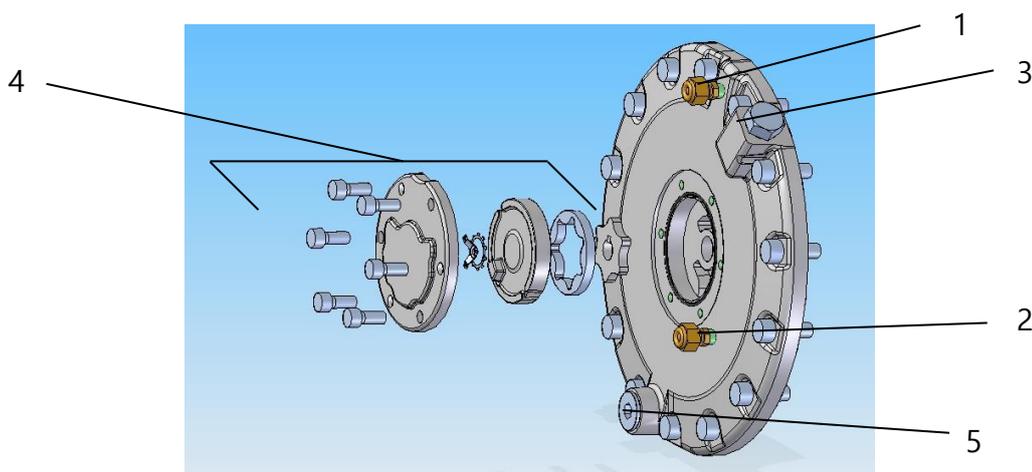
Gear pump for compressors PP4-L/HFxx with forced lubrication
